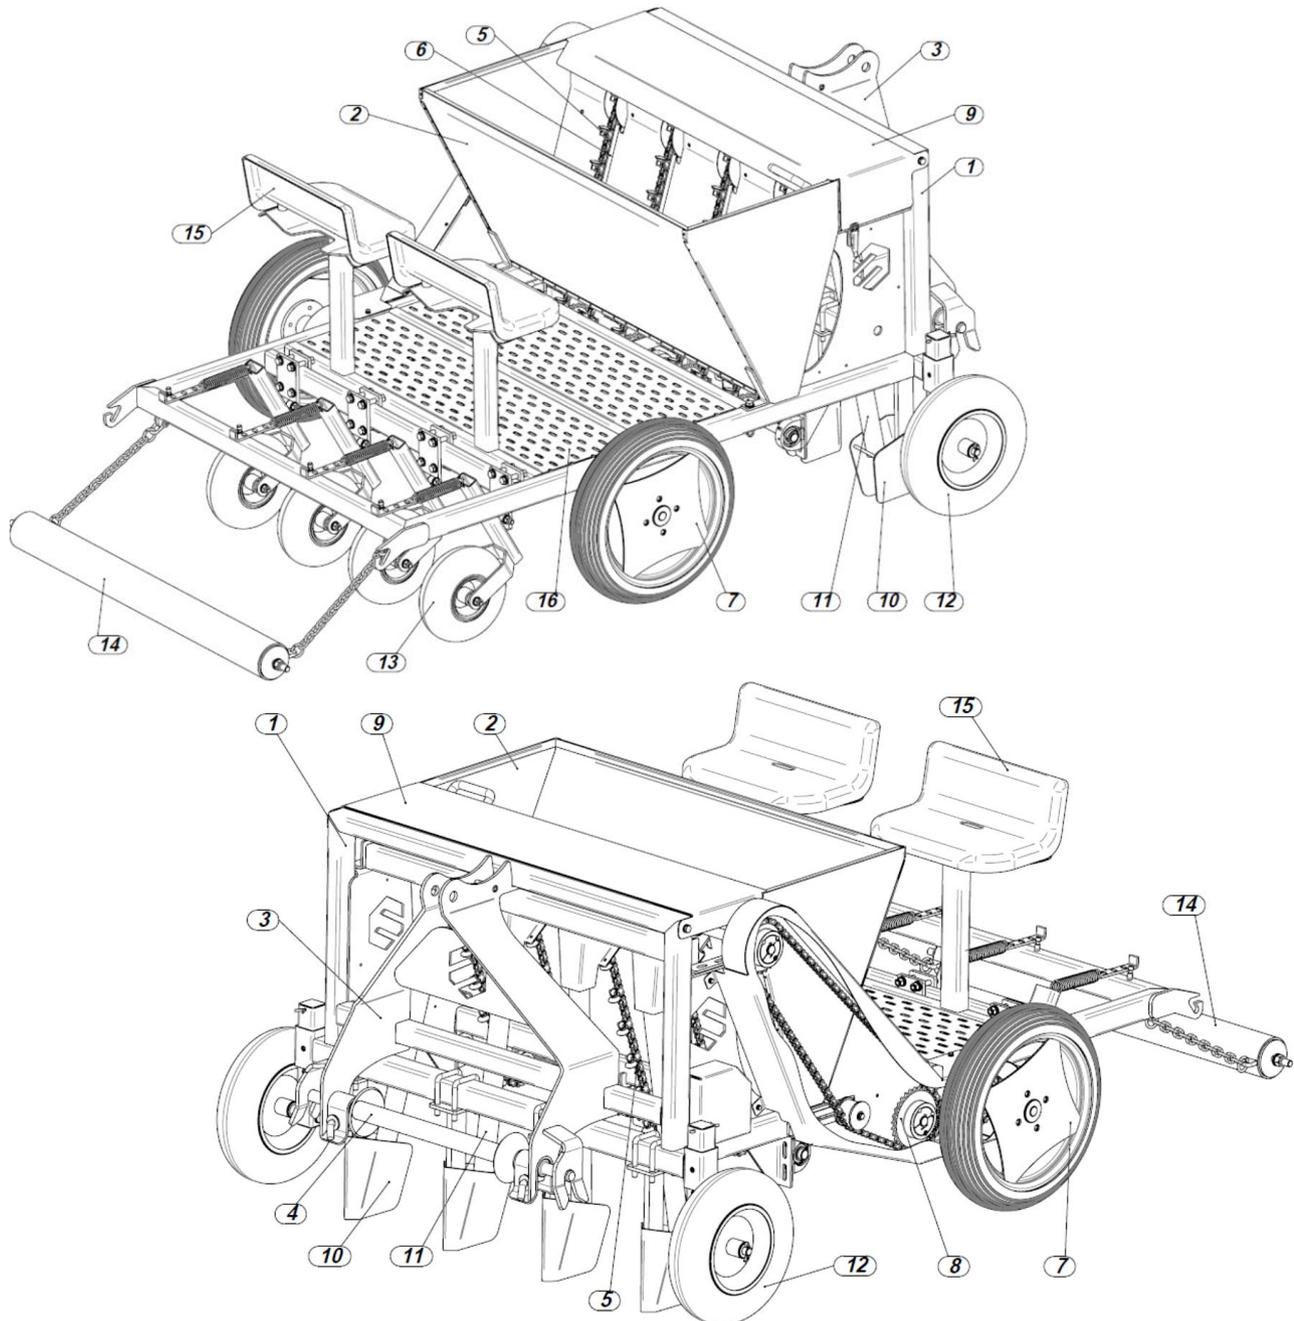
Automatic conveyor 4-row planter: 1 - frame, 2 - tank, 3 - tractor three-point suspension system, 4 - hitching beam, 5 - transport chain conveyor, 6 - chain keeper, 7 - road wheels, 8 - drive sprockets, 9 - drive chain transmission, 10 - markers, 11 - chute pipe, 12 - support wheels, 13 - press wheels, 14 - leveling roller, 15 - seats, 16 - platform
